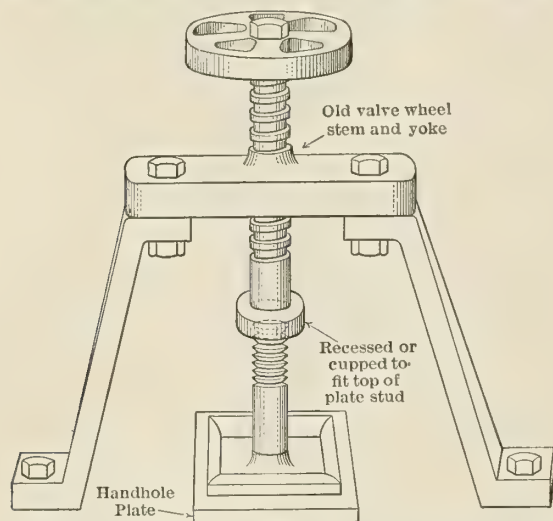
Rig to Hold Babcock & Wilcox Boiler Handhole Plates While Cleaning Gasket Seat
